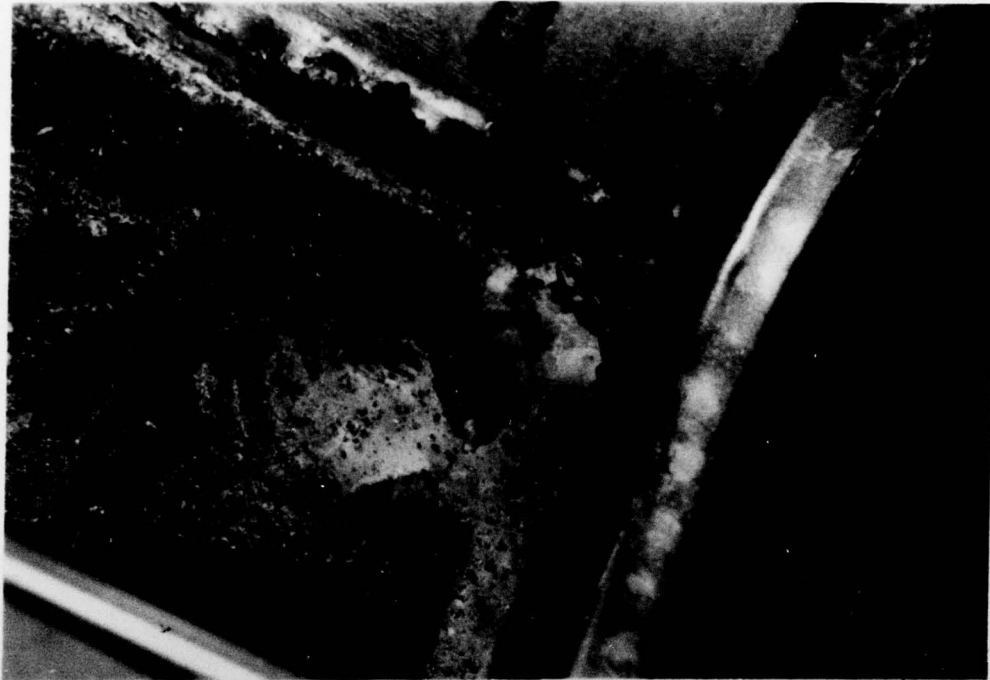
Preformed Steel Plates Being Welded to Left Underside of Front Cross Member.
